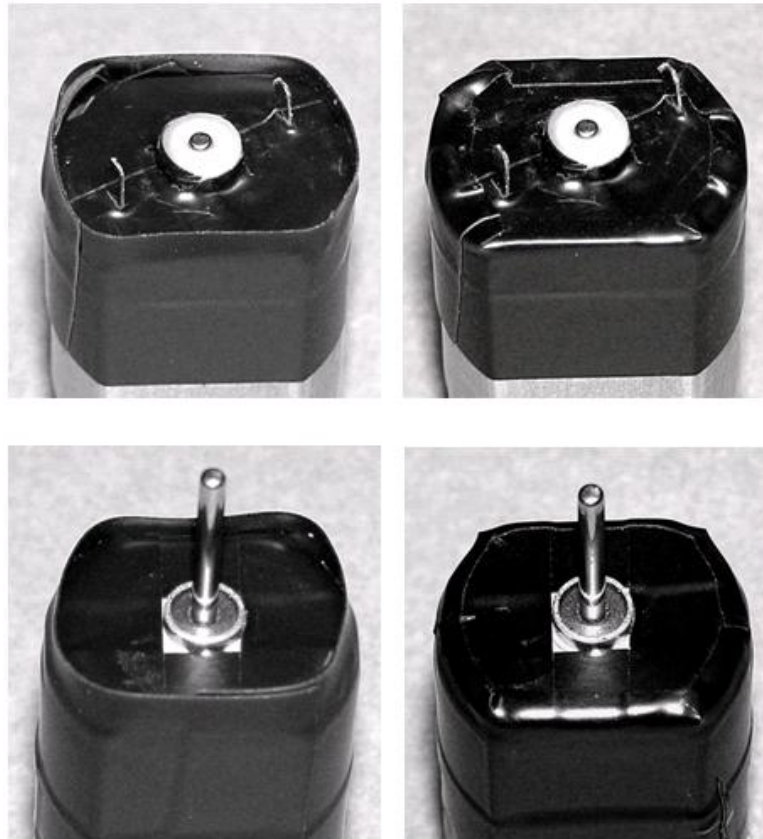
Tape Wrapping Process for the “Shaft” End of a Motor
